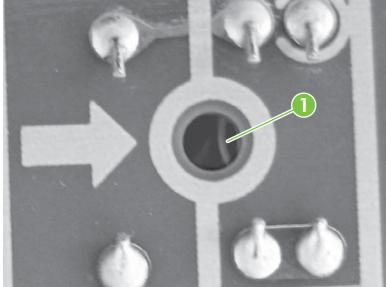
Remove the high-voltage power supply PCA (B) (3 of 3)
